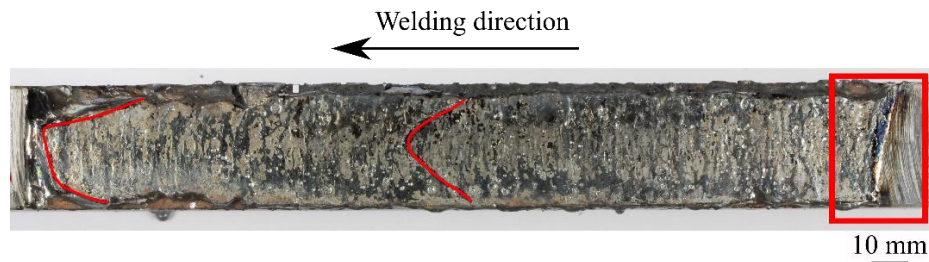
Laser beam welded specimen in steel-glass configuration with the marked melt pool geometry.
